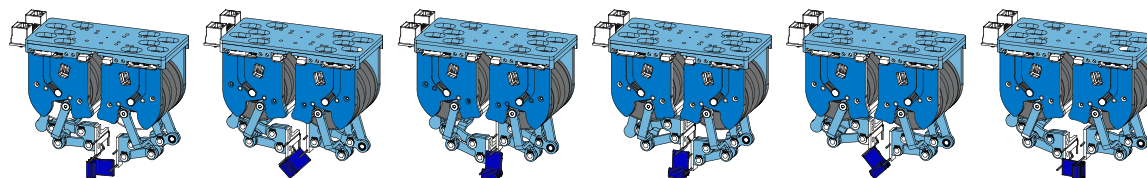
The Dexterous Direct-drive hand reorienting a long bumper to be assembled in an automotive door latch subassembly.
